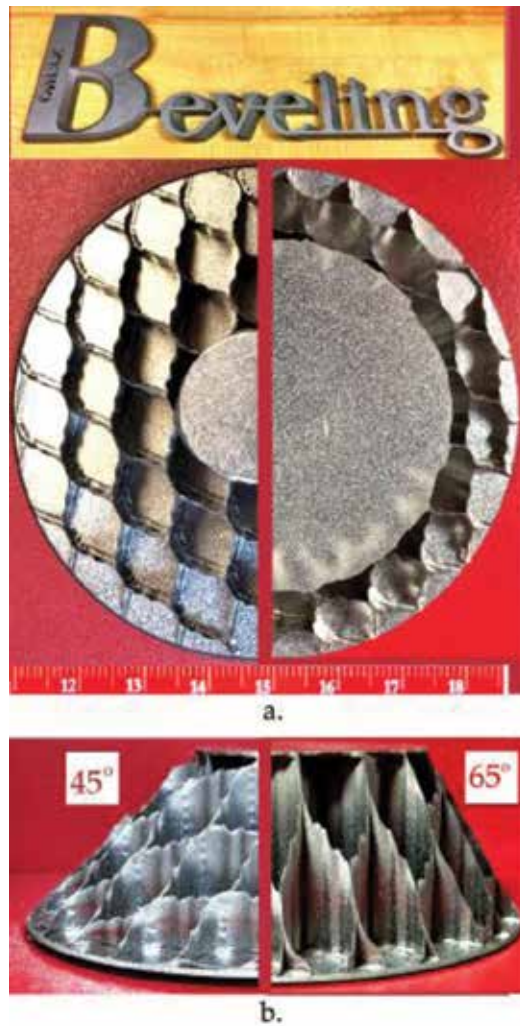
Beveled titanium honeycomb parts (a) Top view (b) Side view.
